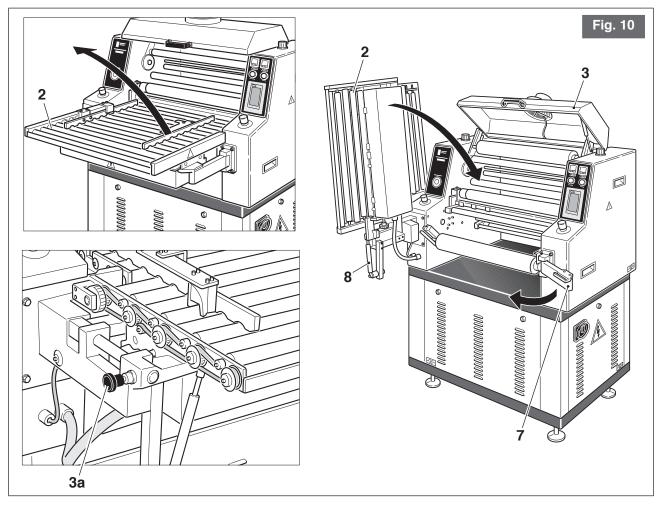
MACHINE START-UP - MOTOR DRIVEN ROLLER CONVEYOR
